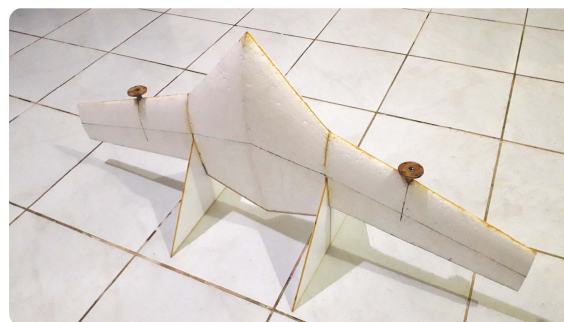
Materials and parts assembly of the main structure of the UAV.
